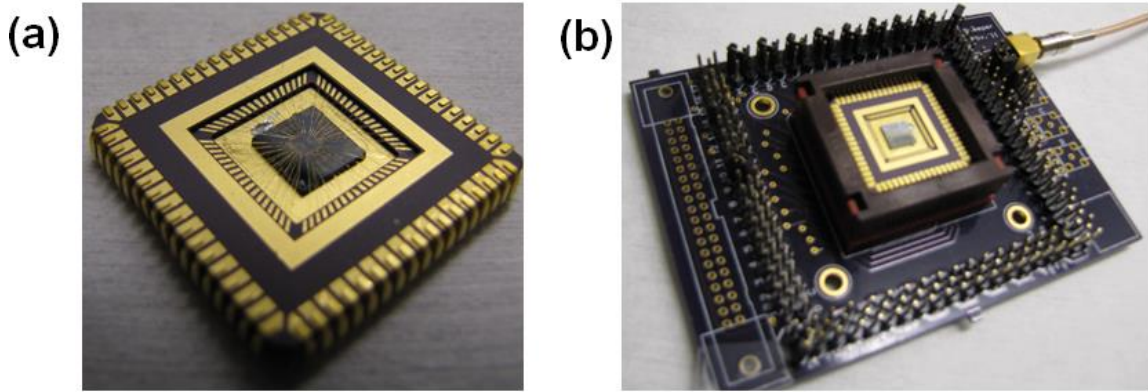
Image of an assembly of the optical phased array system. The chip is bonded on the chip carrier (a), which is hosted by a printed circuit board (b).
